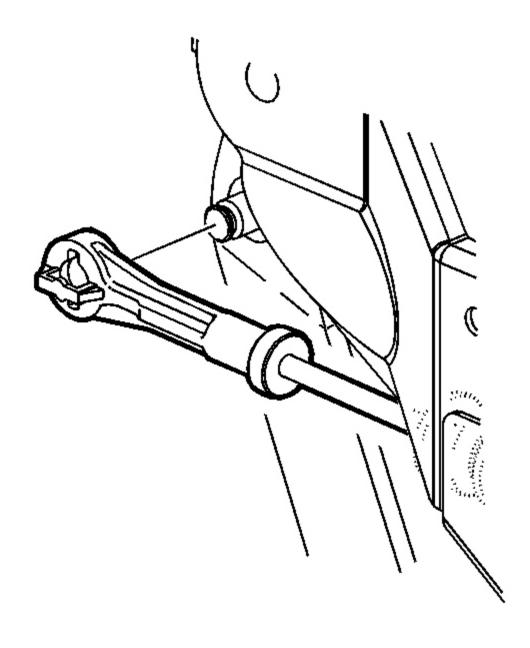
Clutch Master Cylinder & Clutch Pedal Assembly Courtesy of GENERAL MOTORS CORP.
